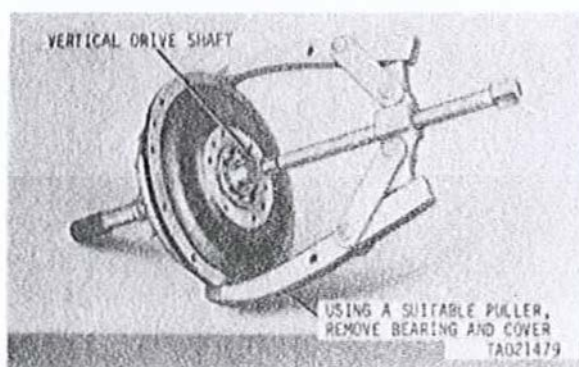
Removing clutch cover and bearing assembly from clutch assembly using puller.
